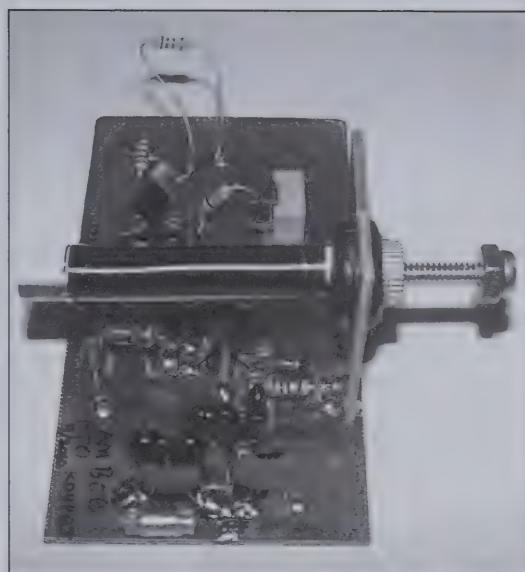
The grommet fits in a hole drilled in a piece of PCB material used as a bracket.
